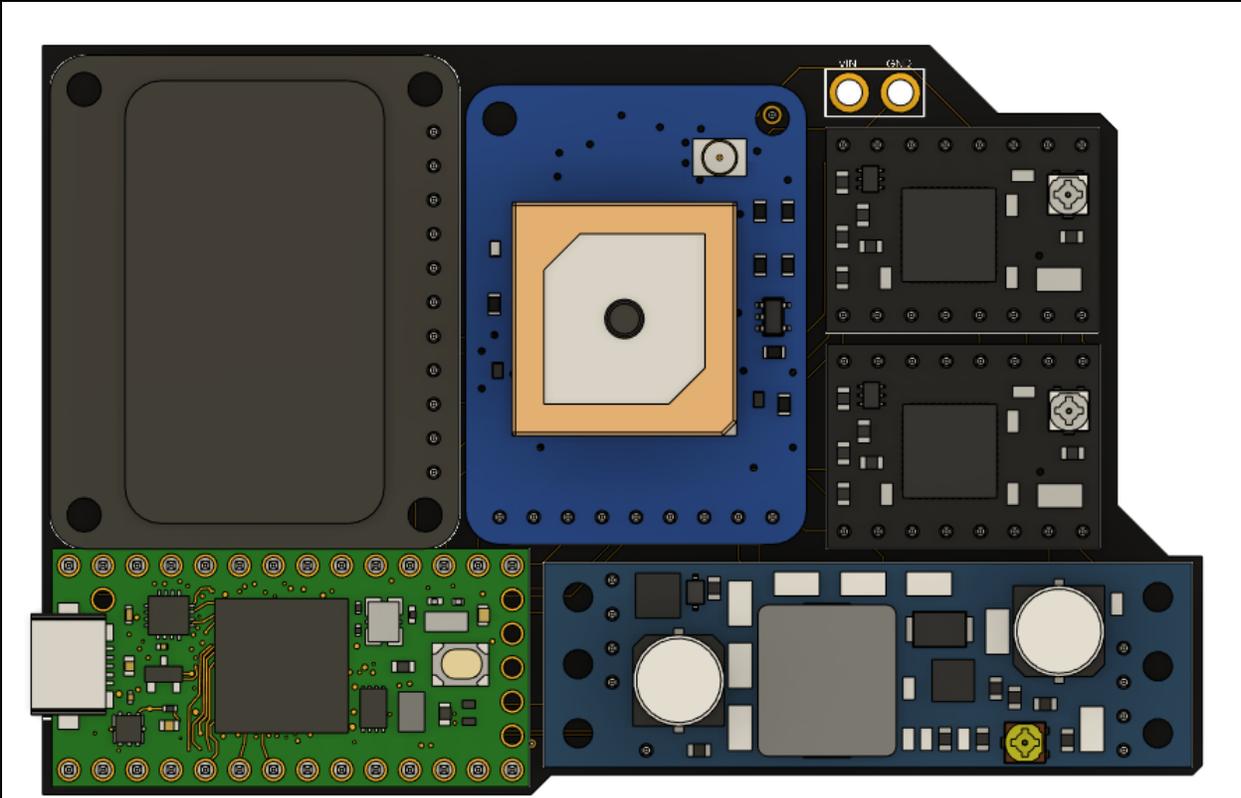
Deployment PCB 3D Board (Top Profile)
